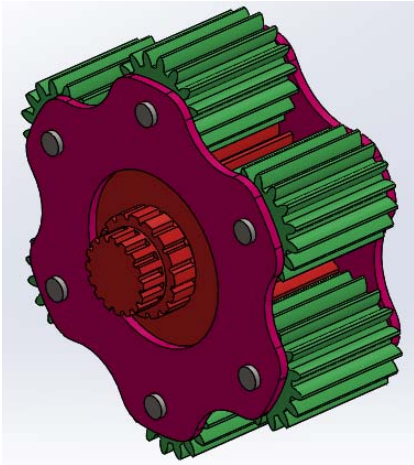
PLANET CARRIER IN ASSEMBLY
